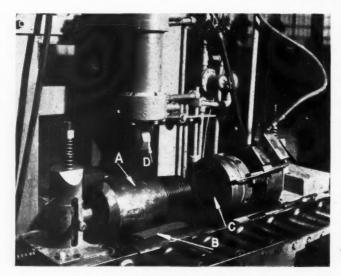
Equipment used to inspect a tool joint for accuracy and "stand-off" of thread.
